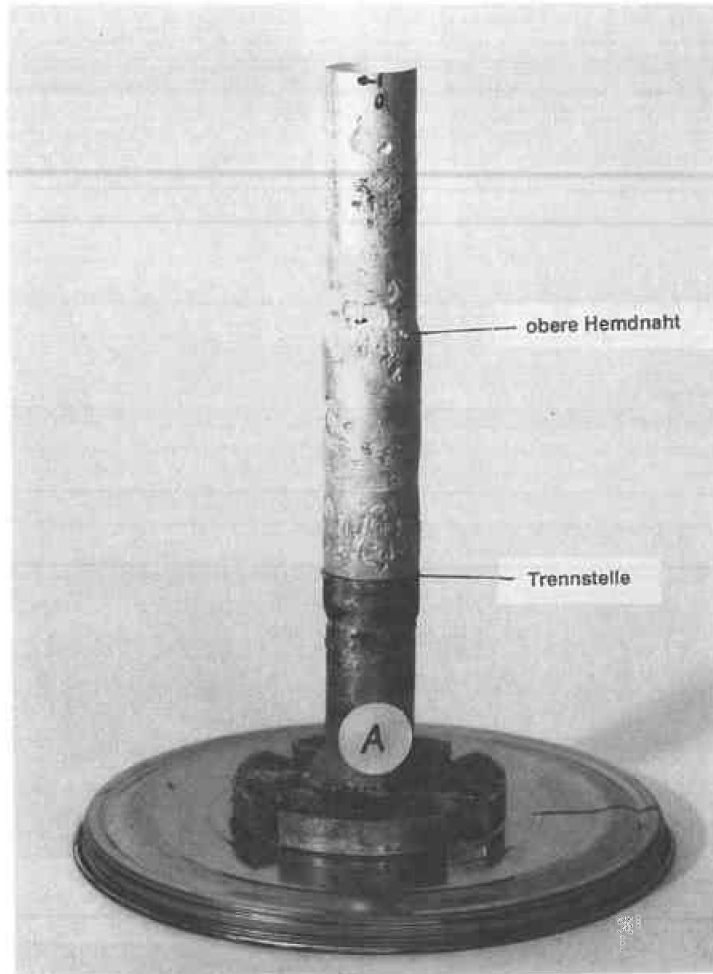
Drain pipe, cut off part, view on outer surface (upper section cleaned)
